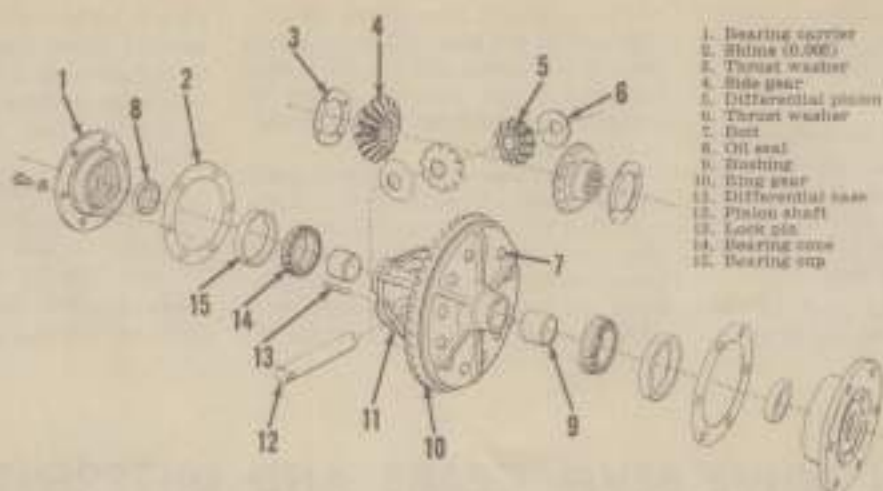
Exploded view of the differential unit. On tractor Serial No. D17-38899 and up, bearing carriers (1) are equipped with an "O" ring seal to transmission housing. On tractor Serial No. D17-42001 and up, water face of bearing carriers are machined for inner friction plate surface of the Bendix band/disc type brakes.
